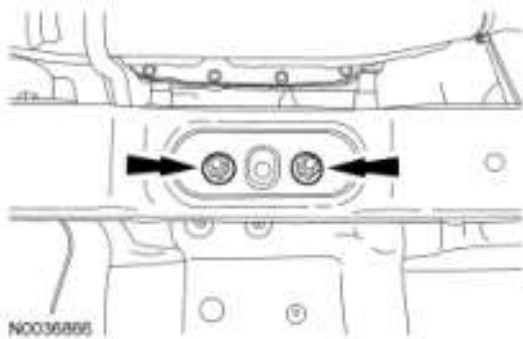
Locating Rear Crossmember Nuts And Crossmember
